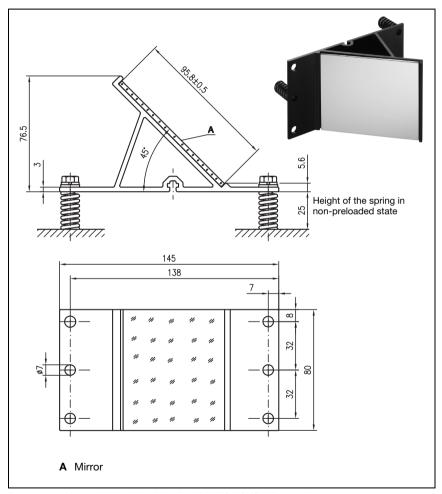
Photo and dimensioned drawing of the US 1 OMS deflector unit
